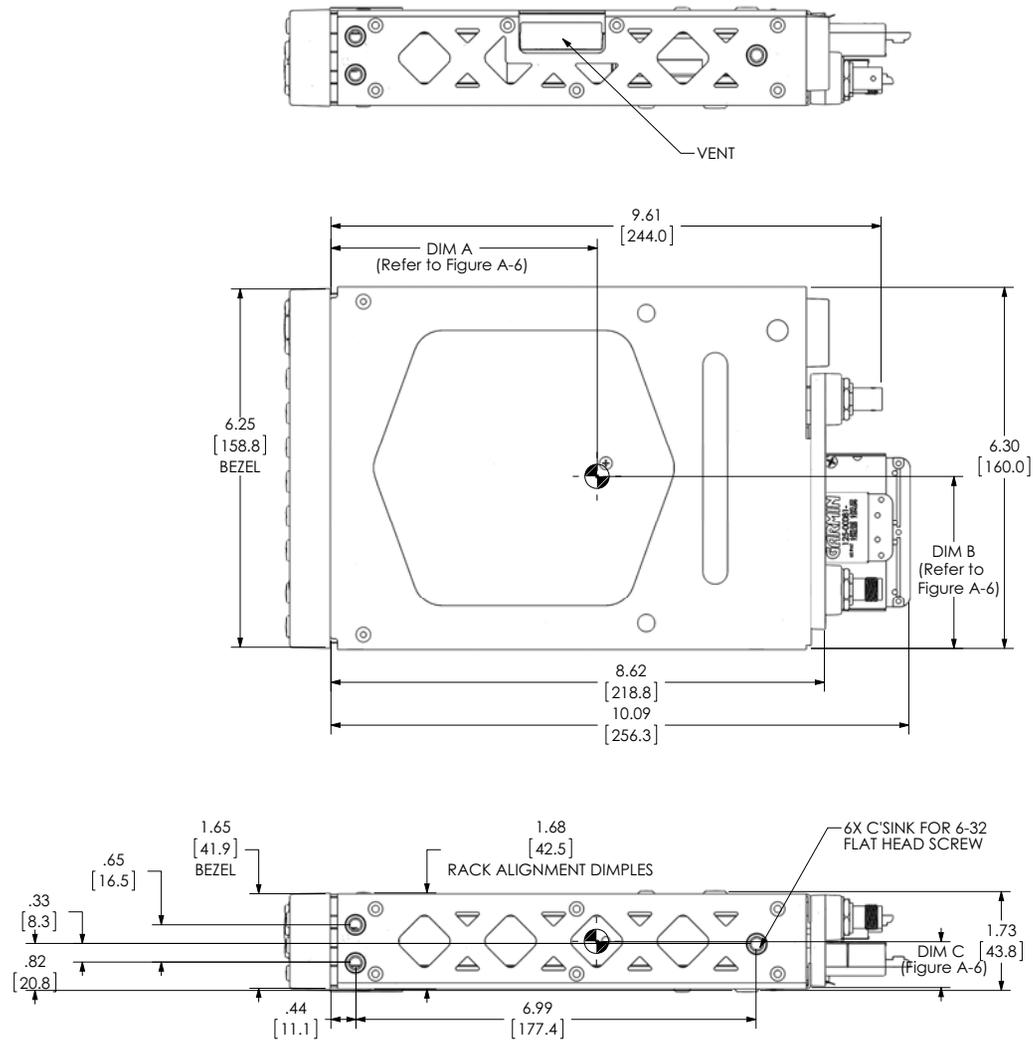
GTX 3X5 Panel Mount Dimensions and Center of Gravity
